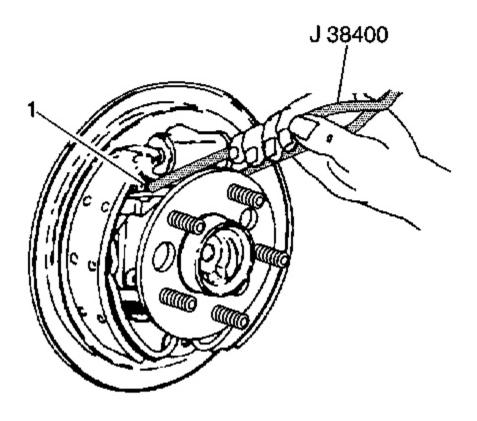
Using J 38400 Courtesy of GENERAL MOTORS CORP.
